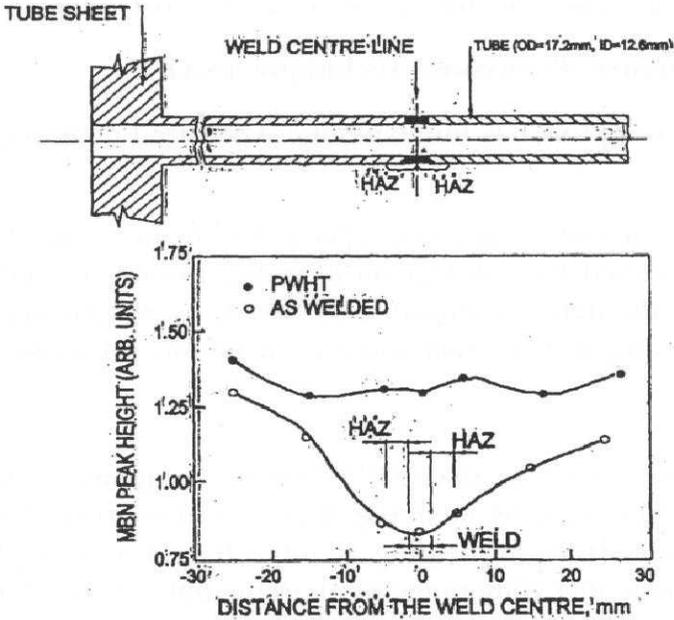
Variation in MBN Peak Height from the Weld Centre Line for Tube to Tube - Sheet Weld Joint
